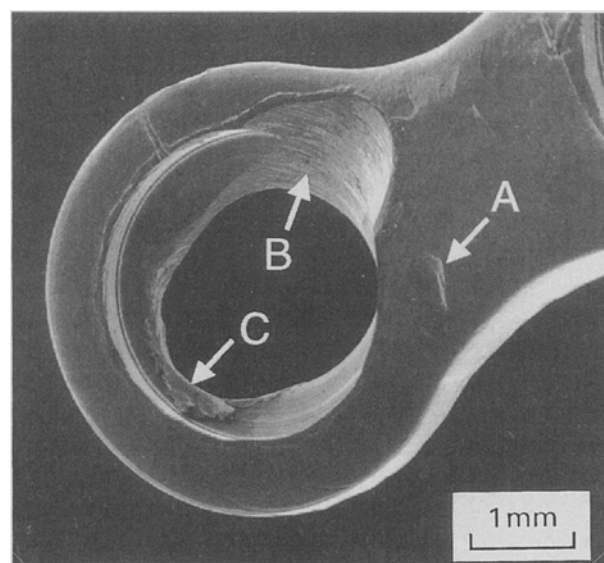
Sharp-edged tool marks on the free surface (A), together with drilling injury (B) and metal tongue formation in a screw hole countersink (C) of a stainless steel plate.
